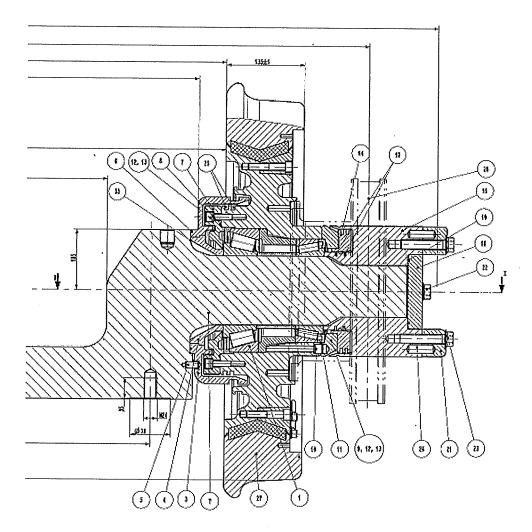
Wheel drawing. The bearing Assy is shown in close-up below.
